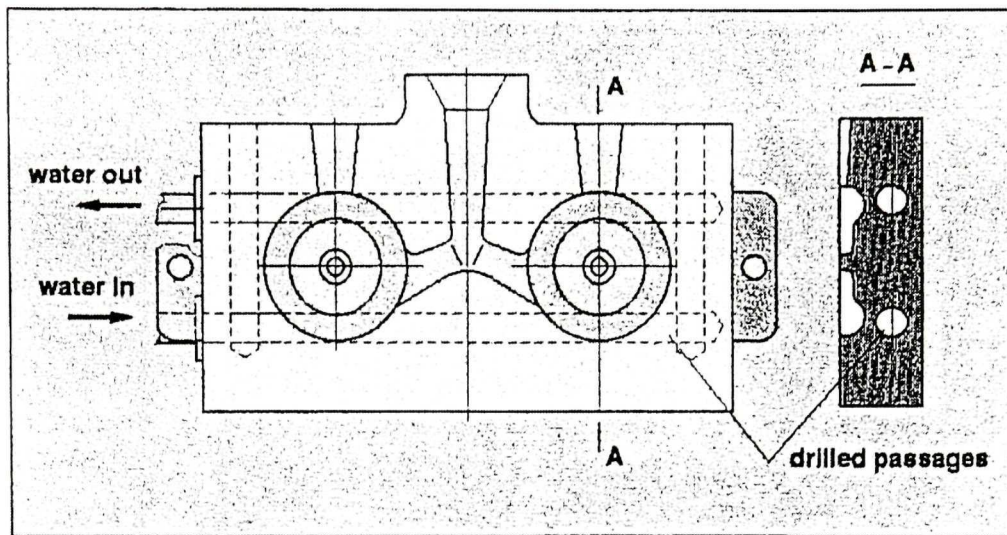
Water-cooled permanent mold with drilled cooling passages in the mold (48)
